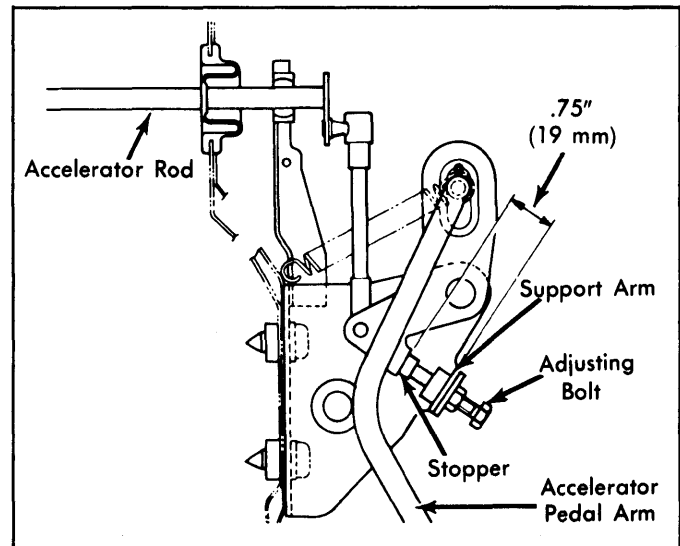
Accelerator Pedal Clearance (Arrow, Colt, Challenger & Sapporo)
